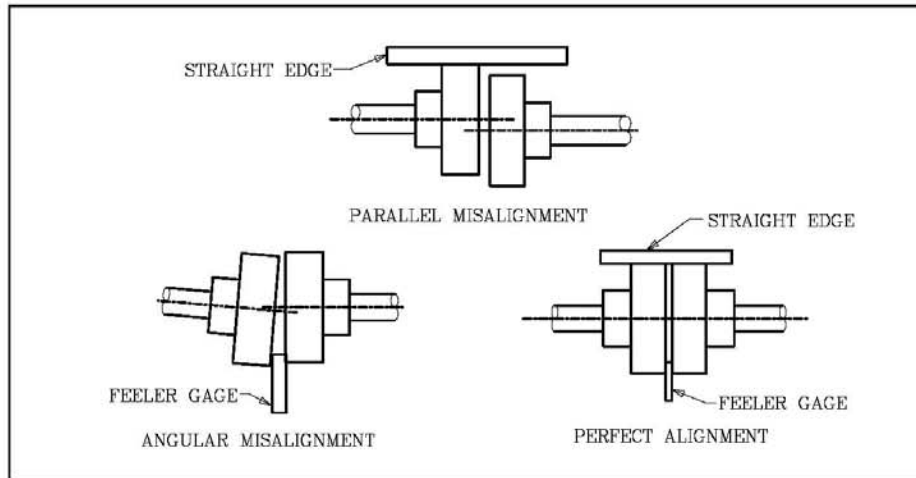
TESTING ALIGNMENT, STRAIGHTEDGE
